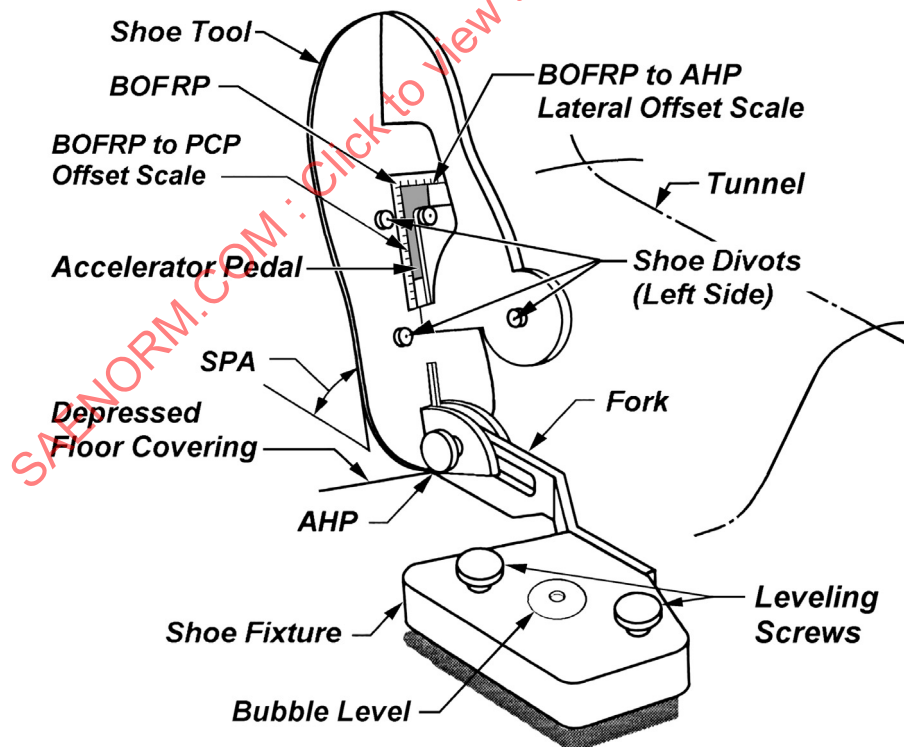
SHOE TOOL INSTALLATION FOR DRIVER SEAT POSITION
